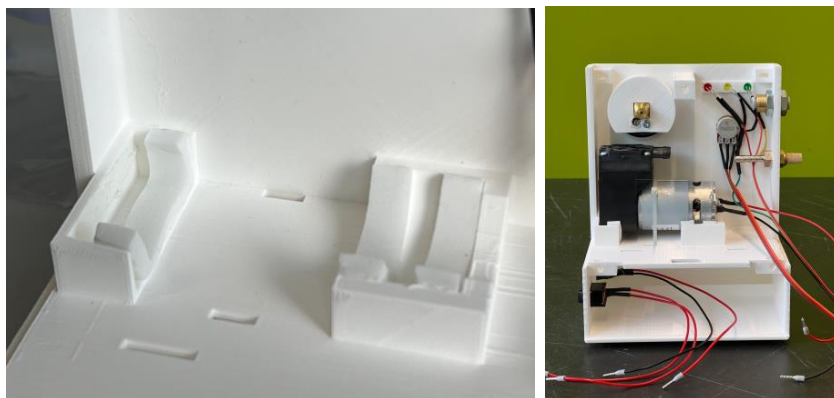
(Left) Foam Tape applied to the housing for the vacuum pump. (Right) Components assembled on the Front Housing.
